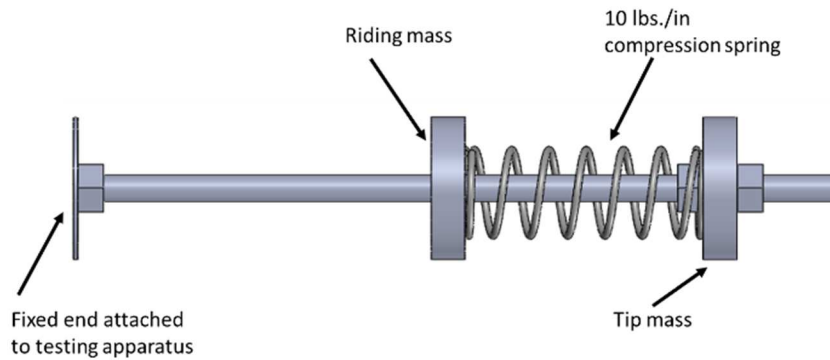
CAD model of tip-attached PATVA showing its components.
